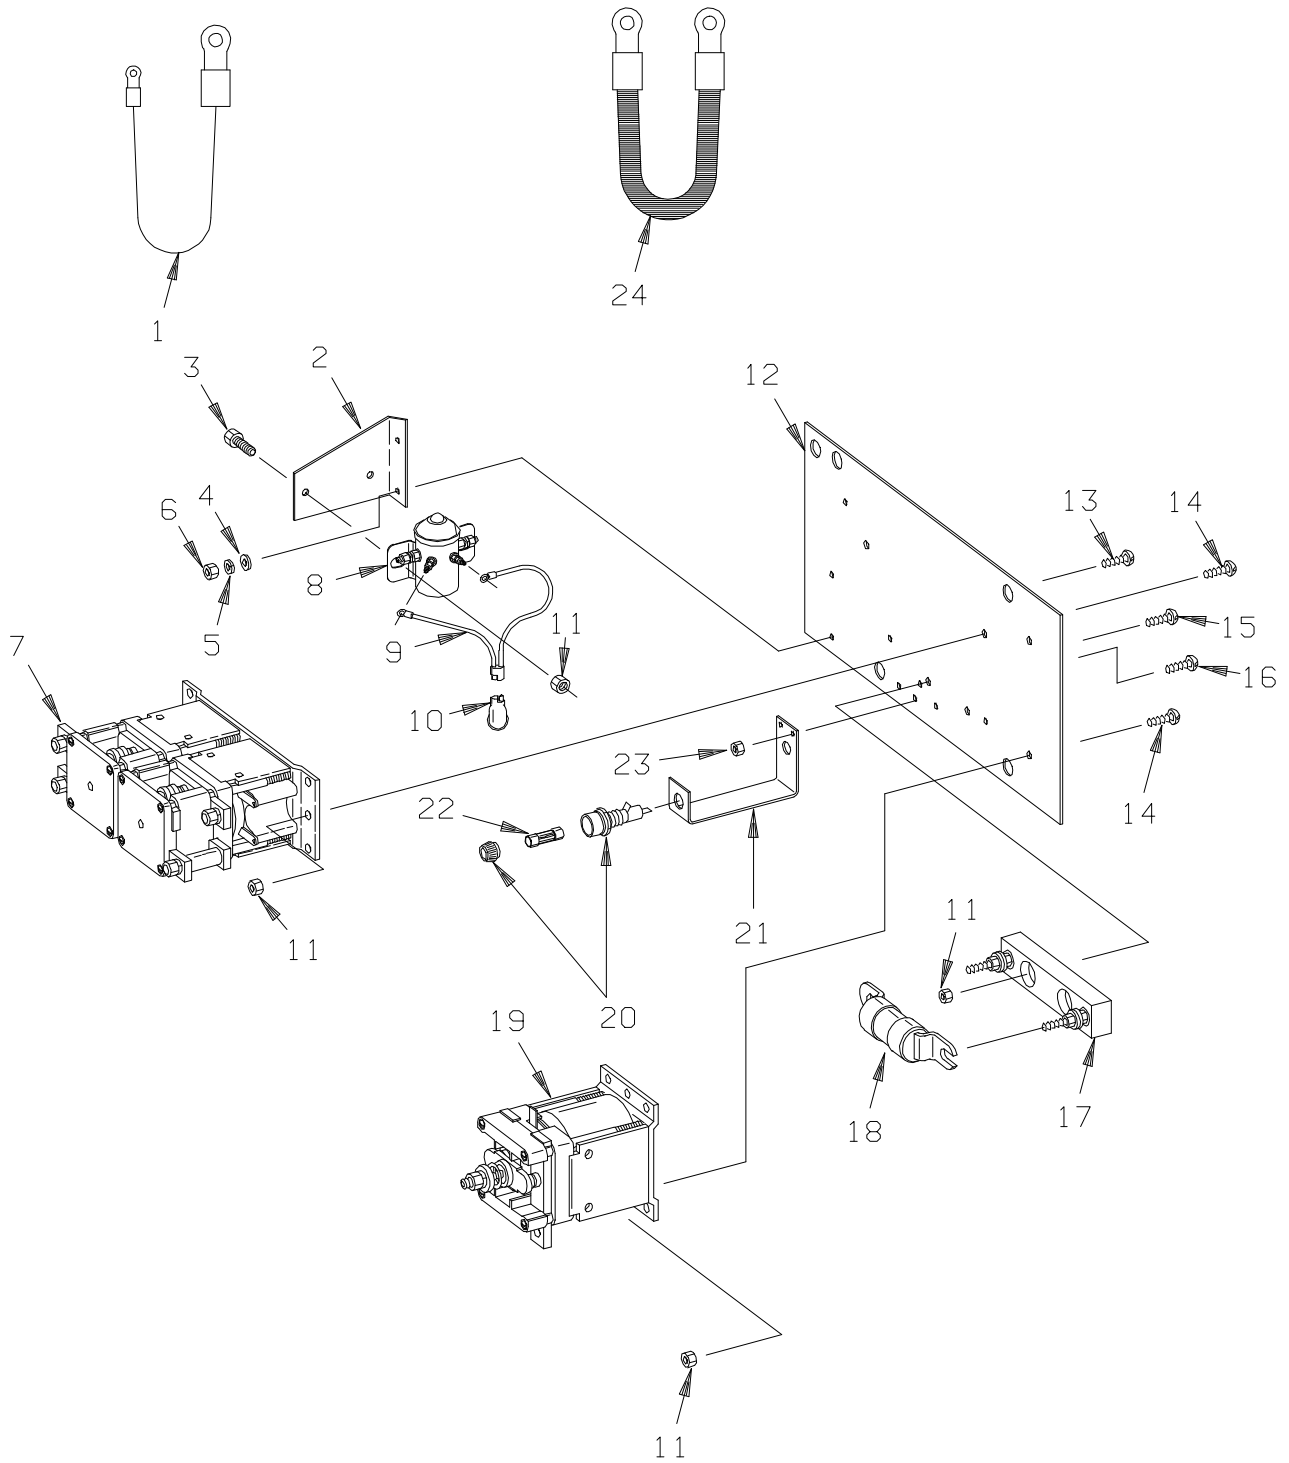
PUMP MOTOR ASSEMBLY (MBD-5107A, 200060)
